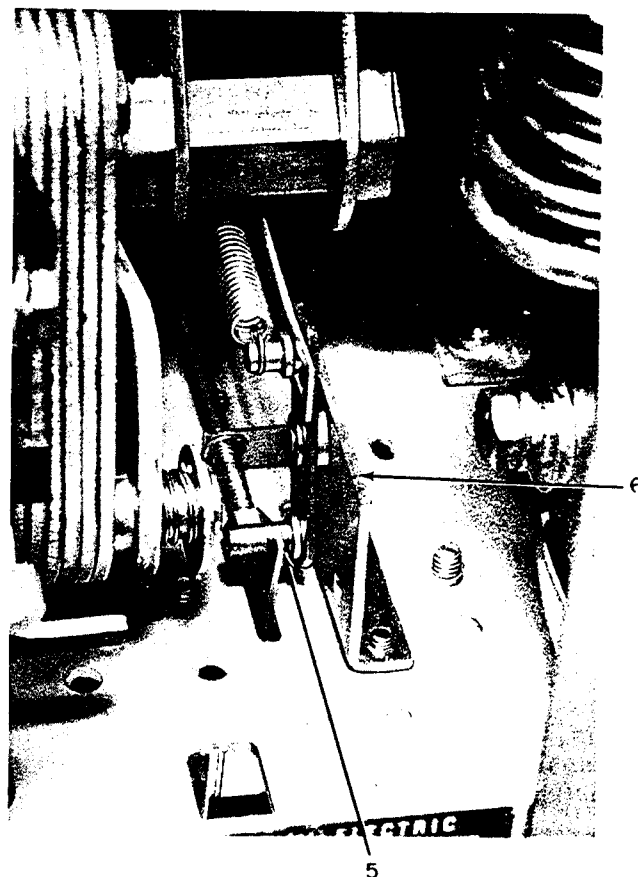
FLUX SHIFT TRIP DEVICE AND OPERATING LINKAGES
